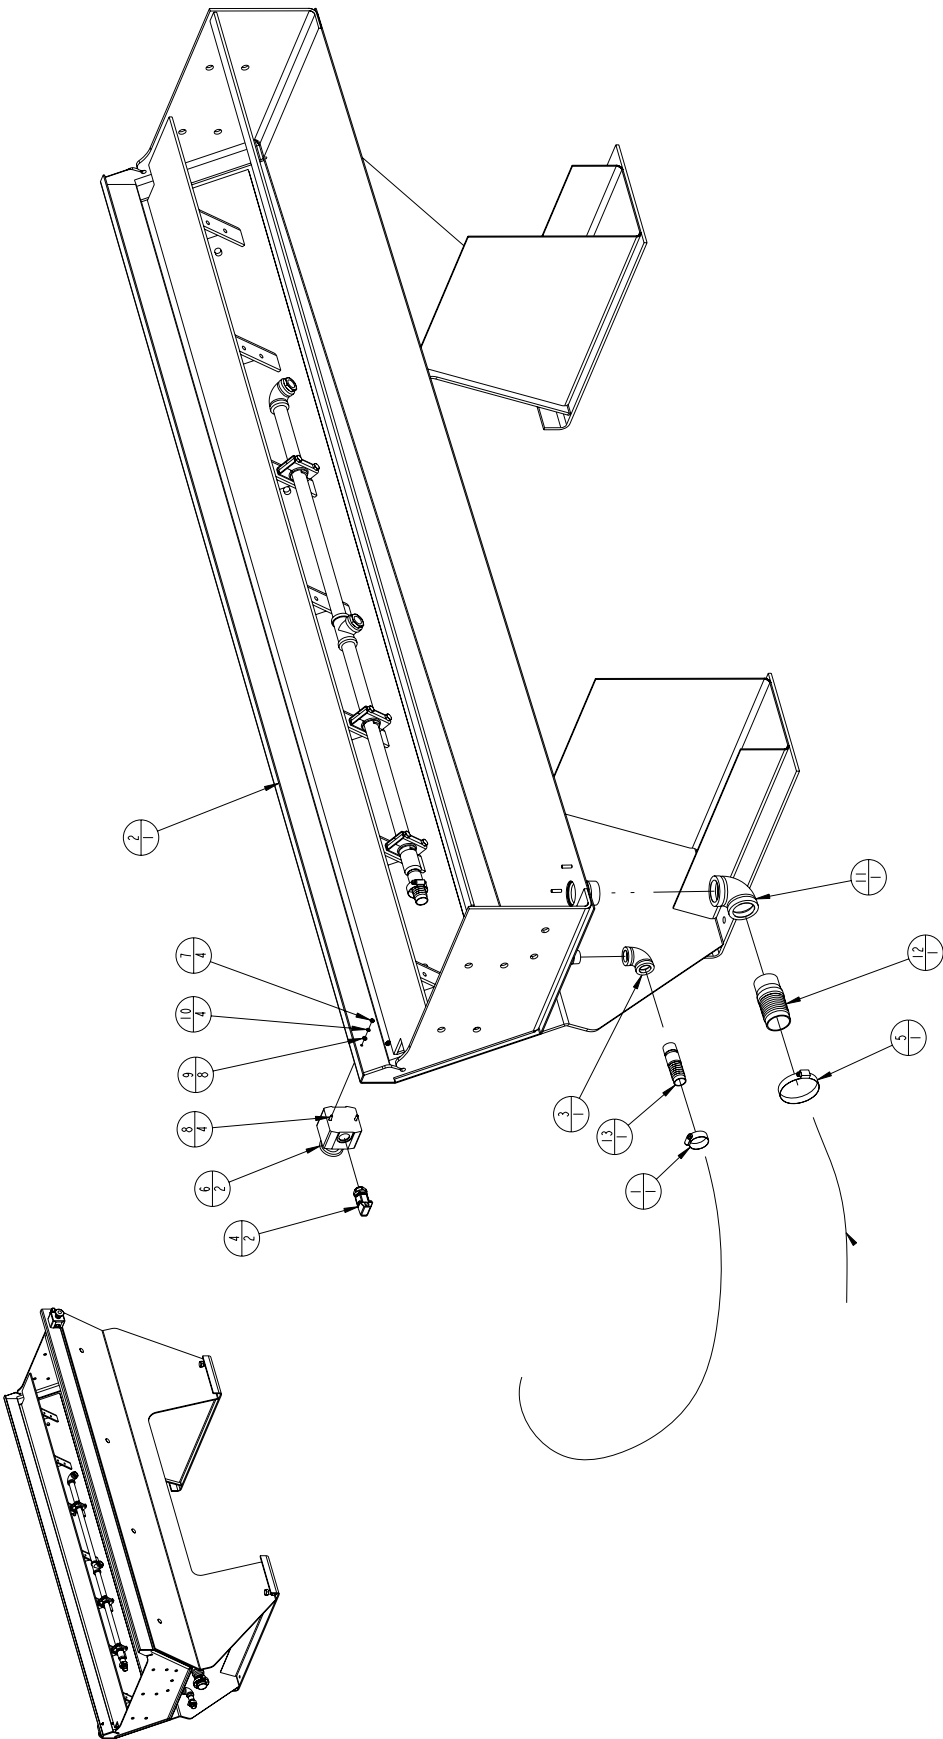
B – 2 METER CARRIAGE BASE ASSEMBLY (3 of 3)
